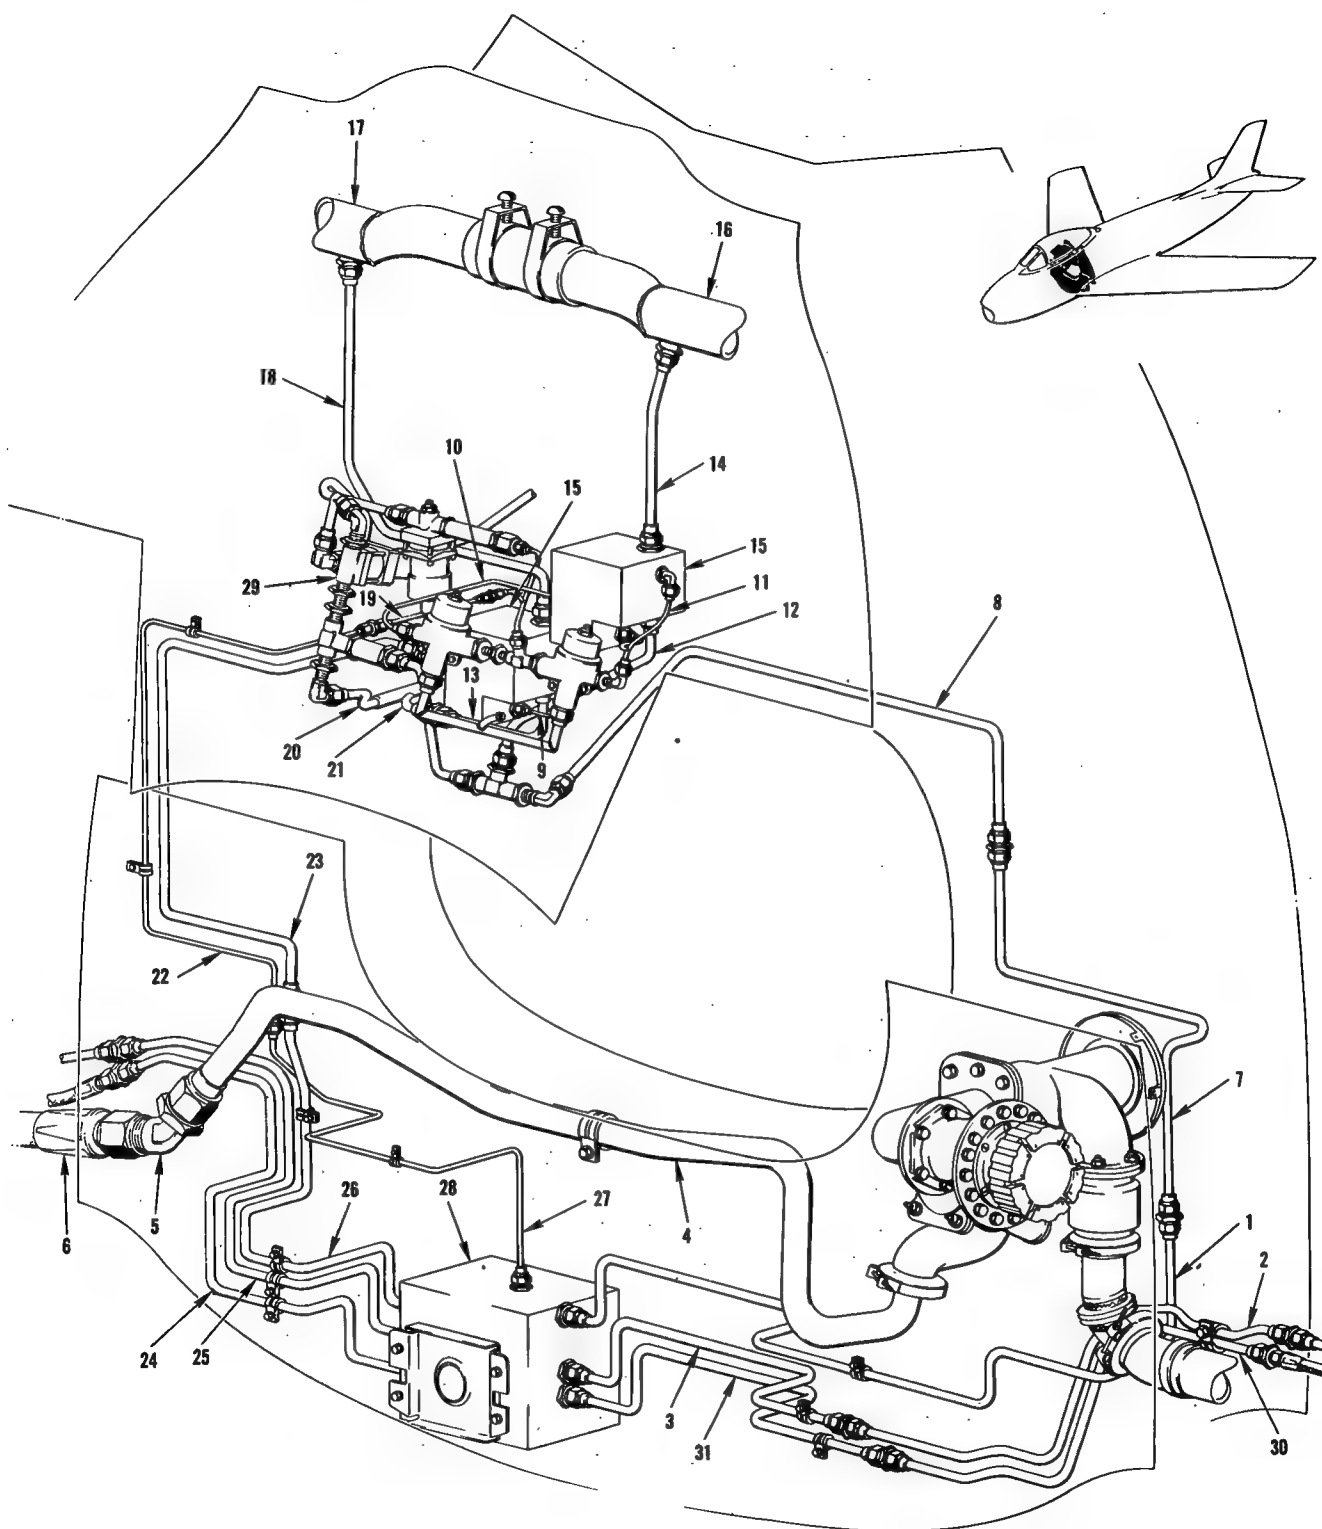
FUEL DROP TANK PRESSURIZING EQUIPMENT VALVE ASSEMBLY
